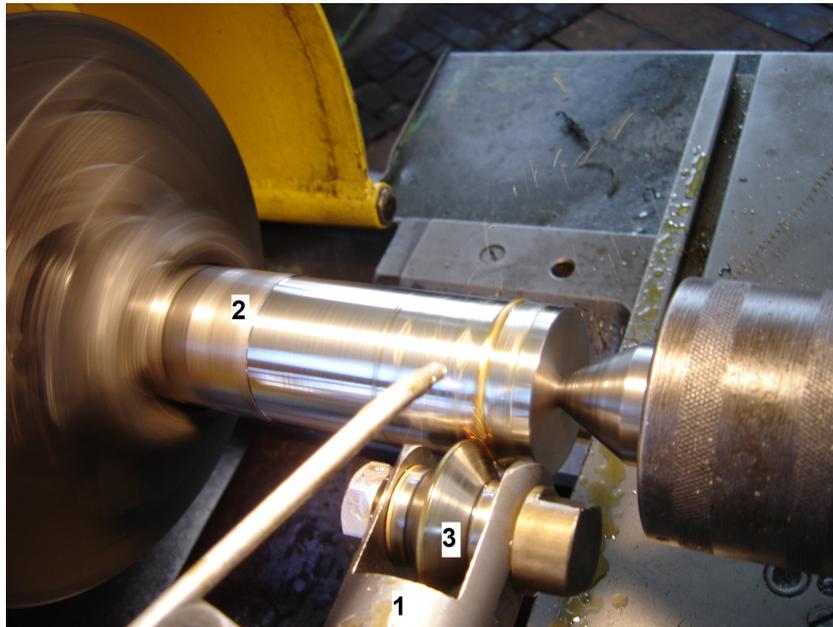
The burnishing rolling – pressuring process (BRP): 1 – burnisher roller (BR-01), 2 – outer cylindrical surfaces, 3 – disk burnishing tool
